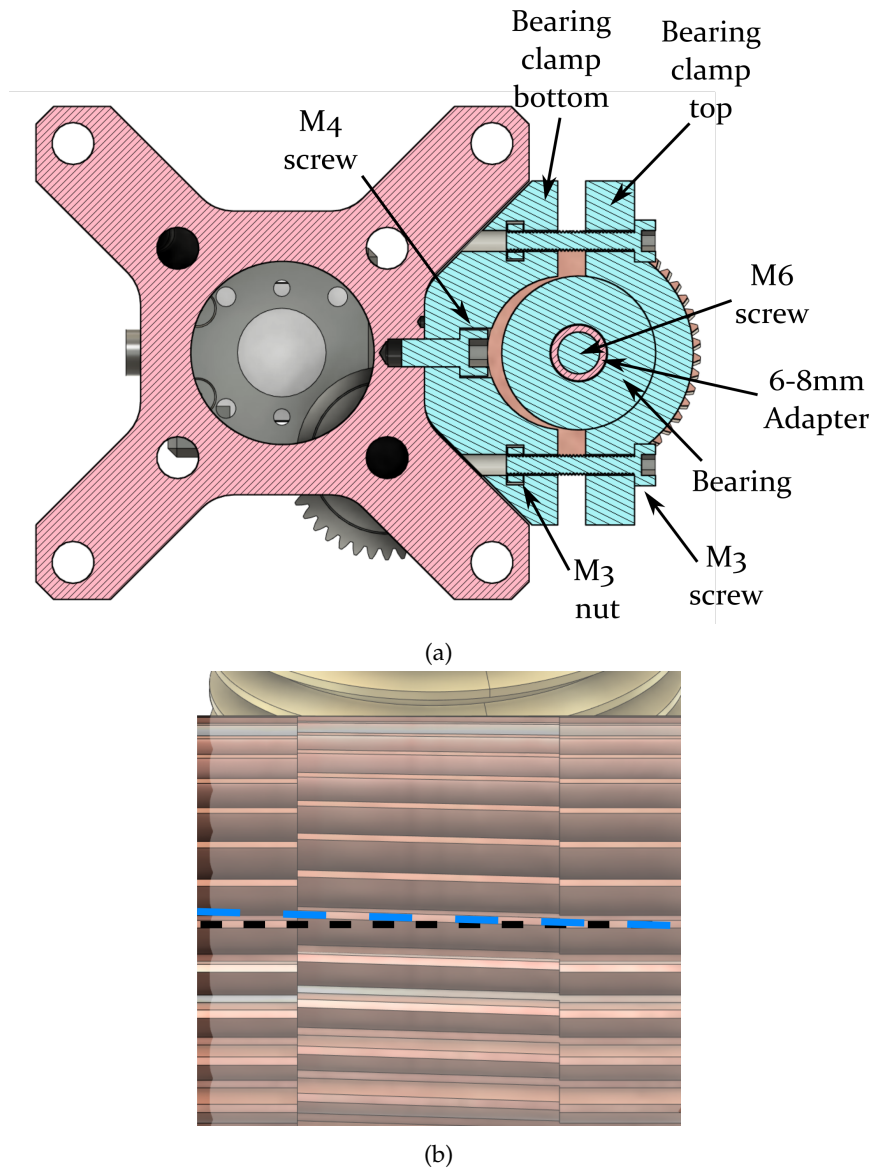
(a) Cross sectional view of the bearing clamp holding the geared barrel assembly to the structural 30-60 cage plate adapters of Section C. The cross section reveals the M3 nuts and screws used for tightening the clamp and adjusting the gear separation distance, and the M4 screw mounting the clamp to the cage. Also visible is the 6-8 mm 3D printed adapter or shim used to centre the M6 screw in the bearing. (b) Close-up view of the central helical gear section of the barrel - the dotted lines show the helical section is angled with respect to either side, which is matched to the angle of the thread on the worm screw.
